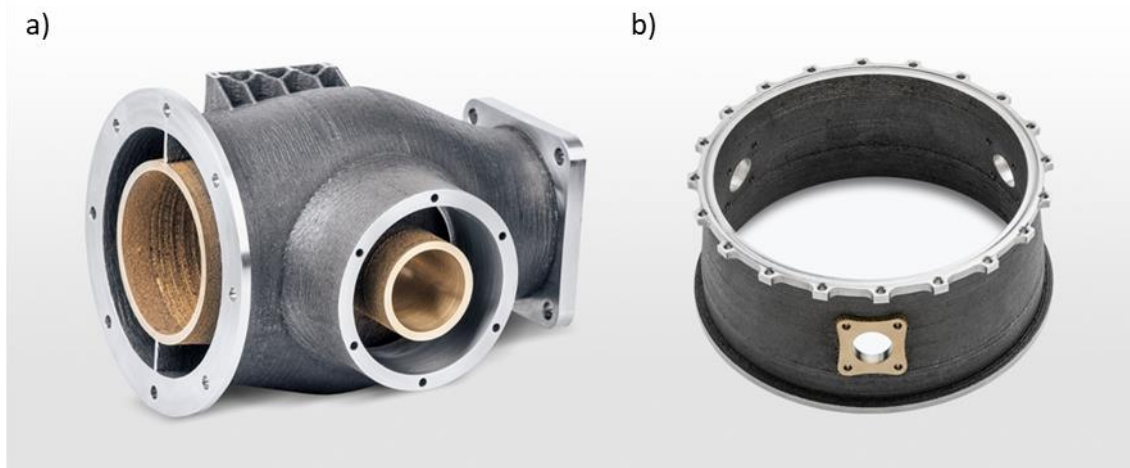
Examples of multi-material parts built by powder DED in hybrid (DED + CNC milling) DMG Mori machines. In a) is a multi-material heat exchanger made of stainless steel and bronze [DMG Mori (1)] and in b) is a multi-material turbine casing built in Inconel 718 and bronze for the aerospace industry [DMG Mori (2)].
